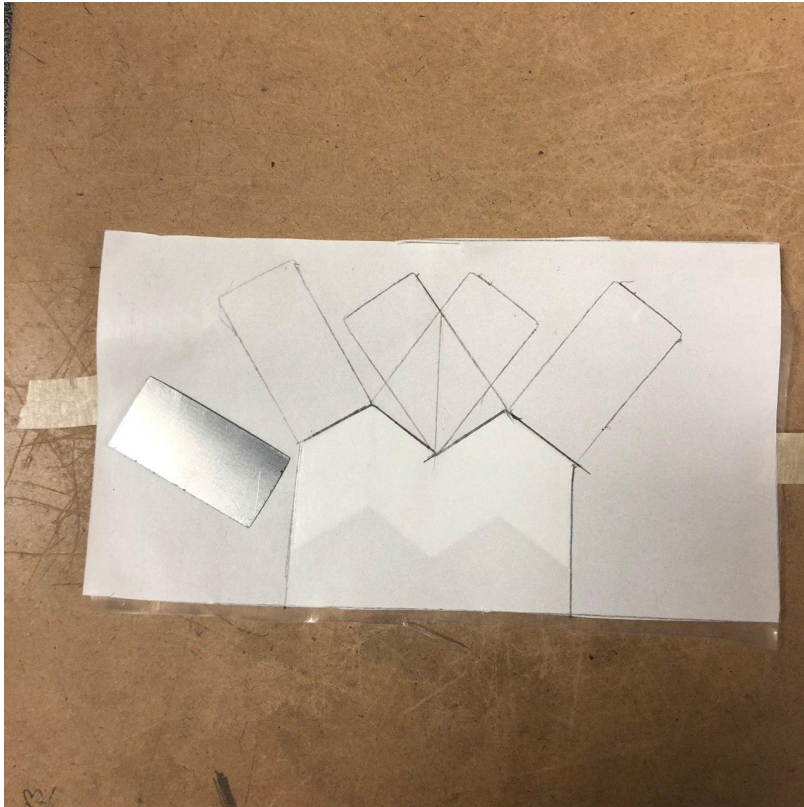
Step 10. Drawing the flaps of the sheet I using the side connecting sheet part.
